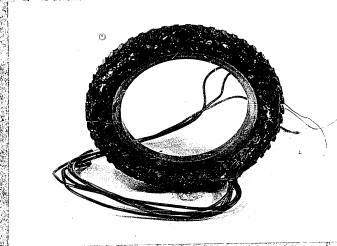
General View of Horizontal Erection Torque Motor Rotor
